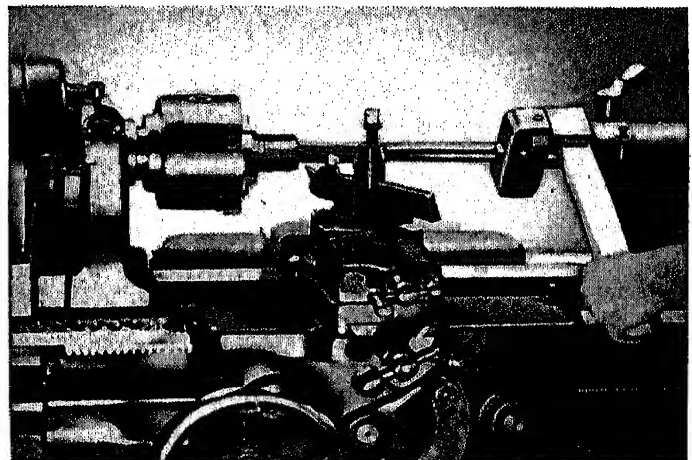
A reamer held in a floating reamer driver. (Courtesy South Bend Lathe Works.)
